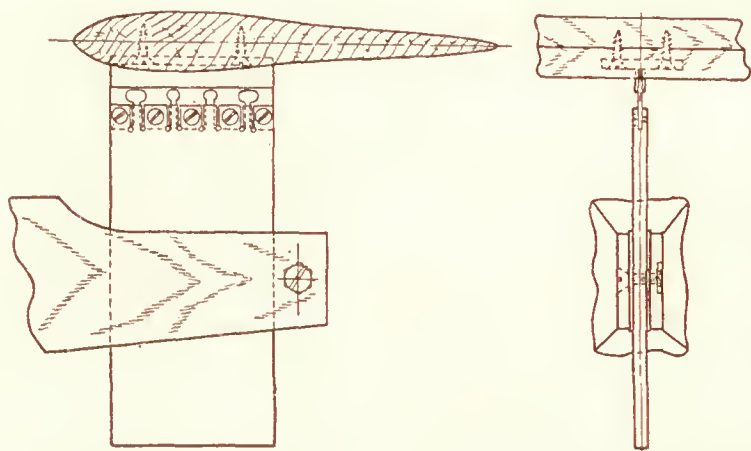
MO-1 horizontal tail plane on elastic knife-edge mounting
